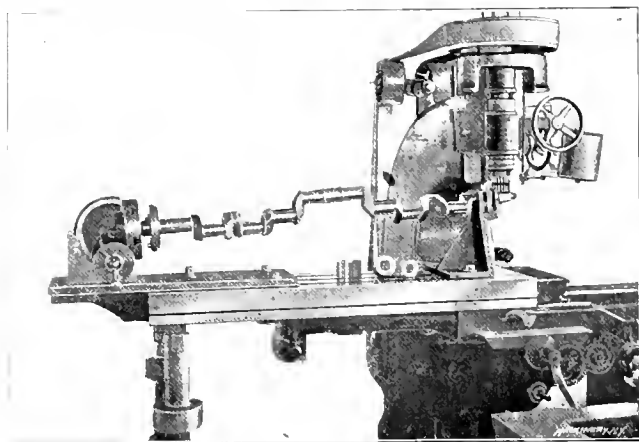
A Vertical Milling Machine set up for Milling the Tapered Square Drive on the Crank-shaft
